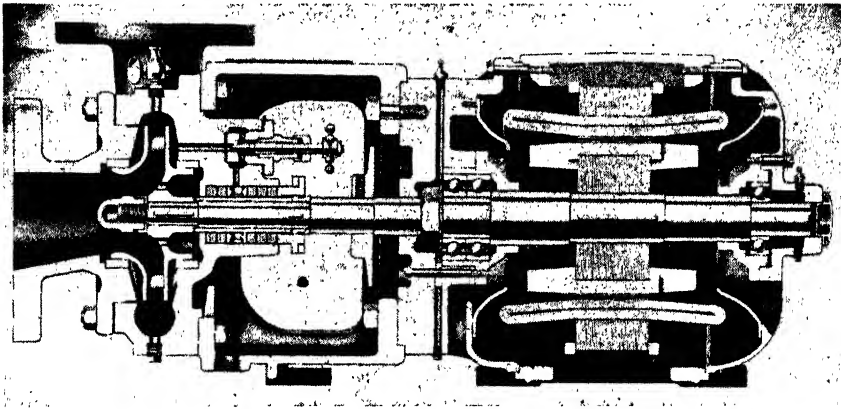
Cross section of Ingersoll-Rand single-stage Motorpump. (Ingersoll-Rand Co.)
